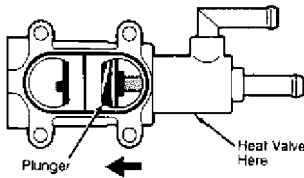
Cross-Sectional View Of Air Valve (Miata, Protege & 323)
